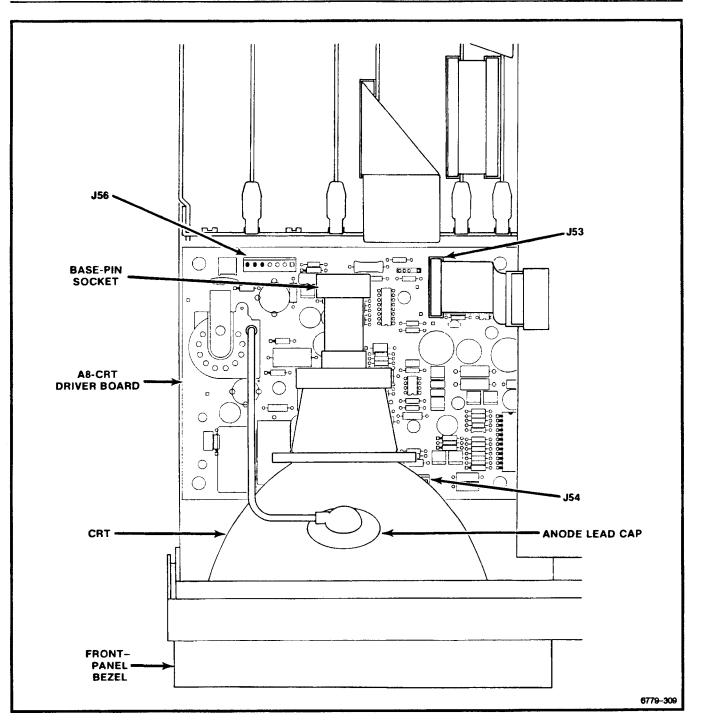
Top view of the crt and A8 CRT Driver board.
